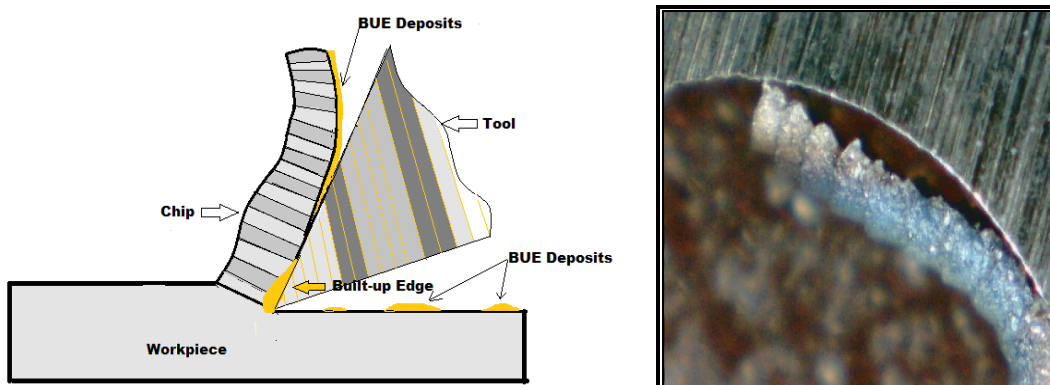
Experimental results - BUE depiction theoretical drawing and actual picture of a chip welded to the rake face of a tooth during the cutting process.
